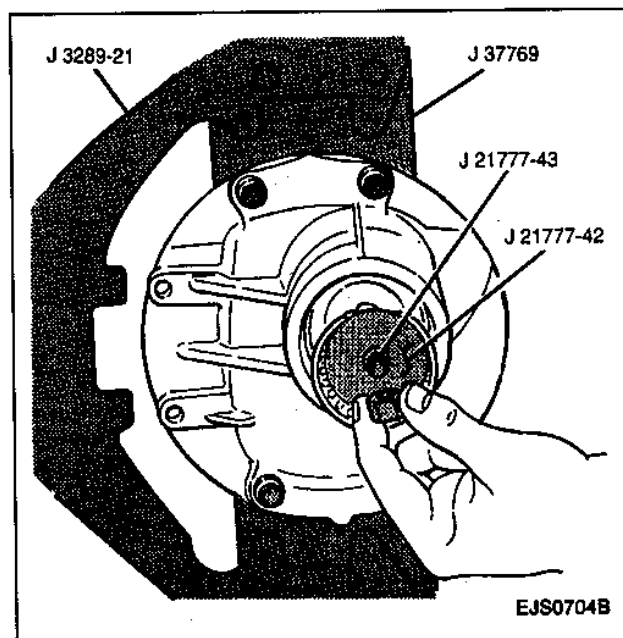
Installing Outer Pinion Bearing, Pilot Washer and Nut
